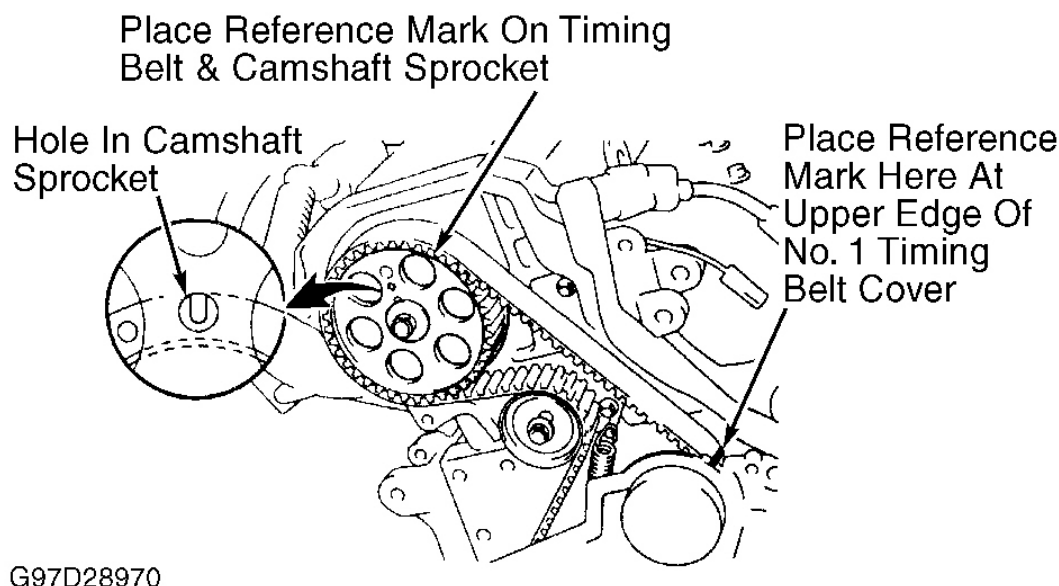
Aligning Camshaft Timing Marks & Installing Reference Marks
